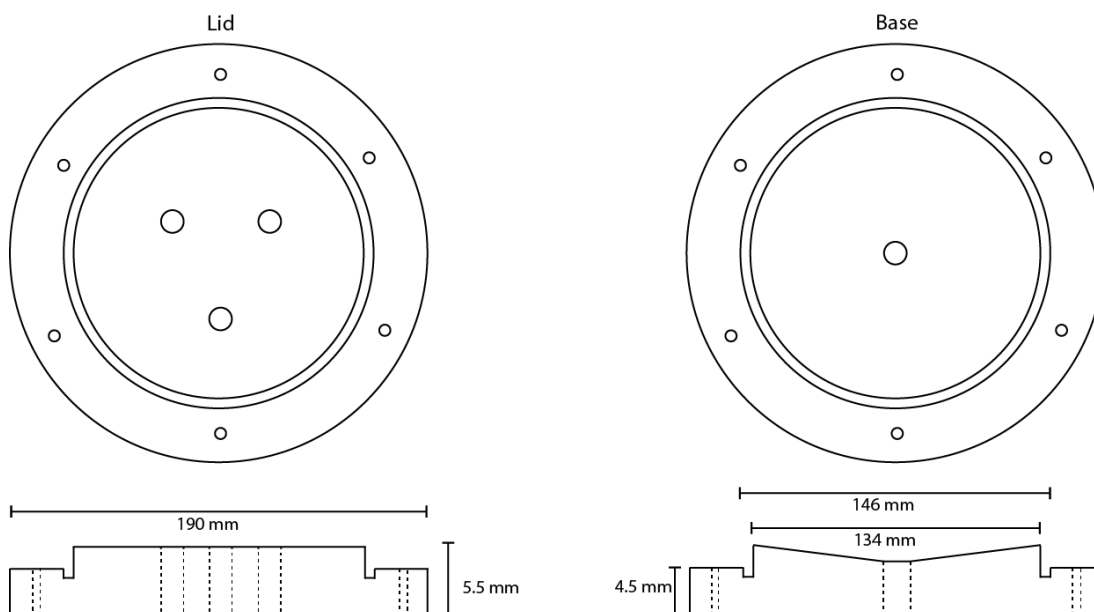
Polyvinyl chloride (PVC) lid and base of field sparging jar. The six outer holes hold $\frac{1}{4}$ " threaded steel rods used to compress a neoprene o-ring contained in the circular trough against the top and bottom edges of the PerspexTM (acrylic) tube that forms the walls of the vessel. The o-ring is lightly coated in silicon grease. The holes in the lid and base are $\frac{1}{4}$ " NPT to hold valves and SwagelokTM fittings.
